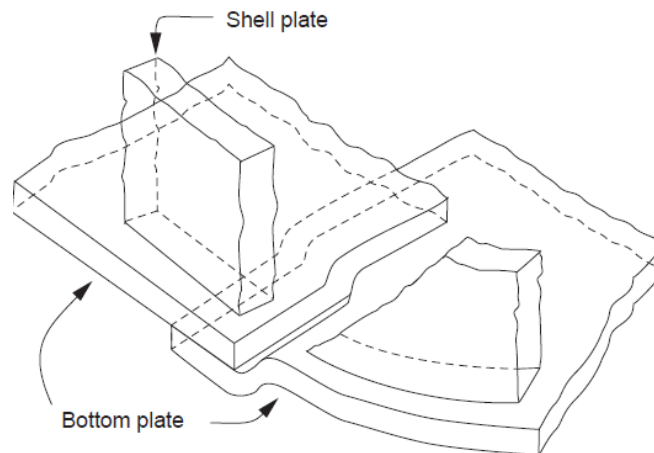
B—Method for Preparing Lap-Welded Bottom Plates under Tank Shell (See 5.1.5.4)
